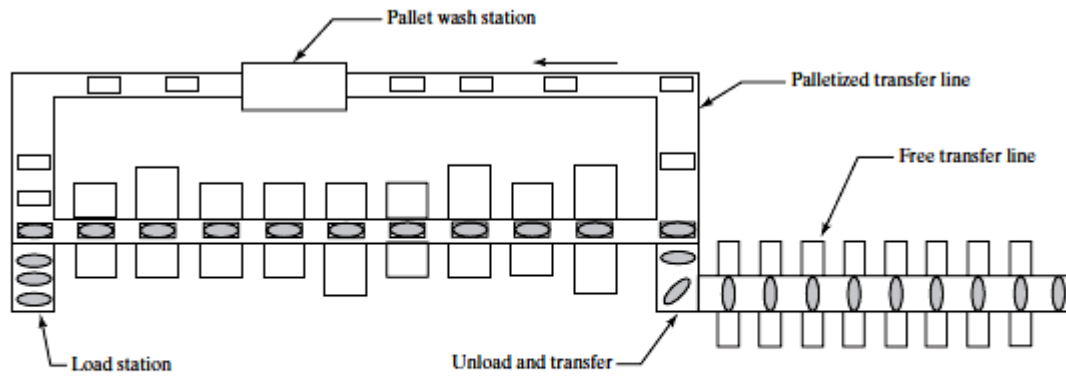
Two machining transfer lines. On the left is a segmented in-line configuration that uses pallet fixtures to locate the work parts. The return loop brings the pallets back to the front of the line. On the right, the second transfer line is an in-line configuration. The manual station between the lines is used to reorient the parts, represented as ovals. Pallet fixtures are represented as rectangles.
